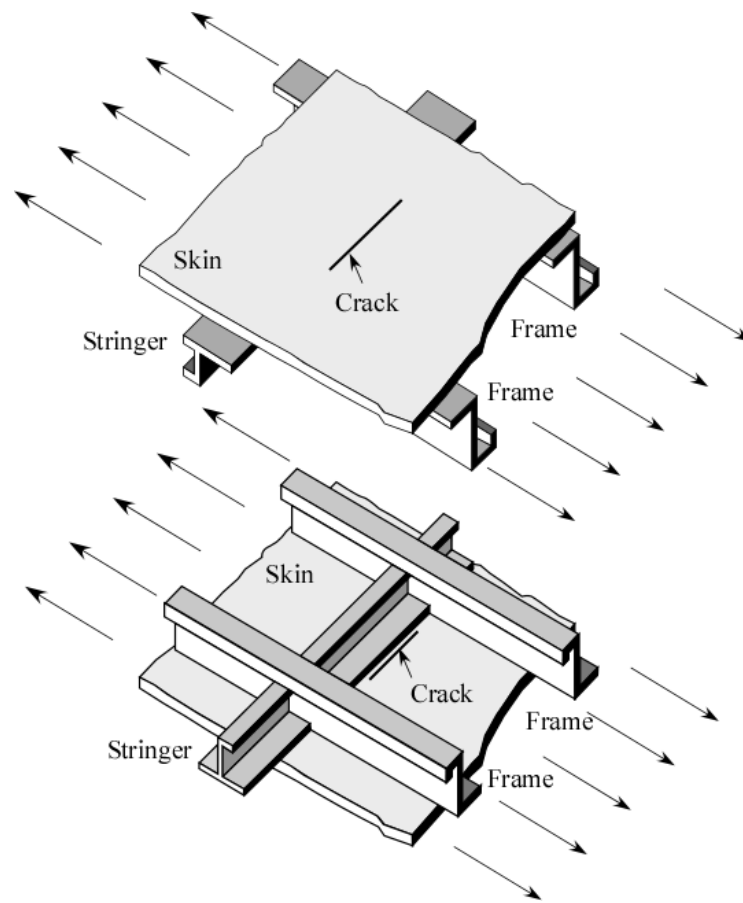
Typical aircraft fuselage element with a crack at the stringer.
